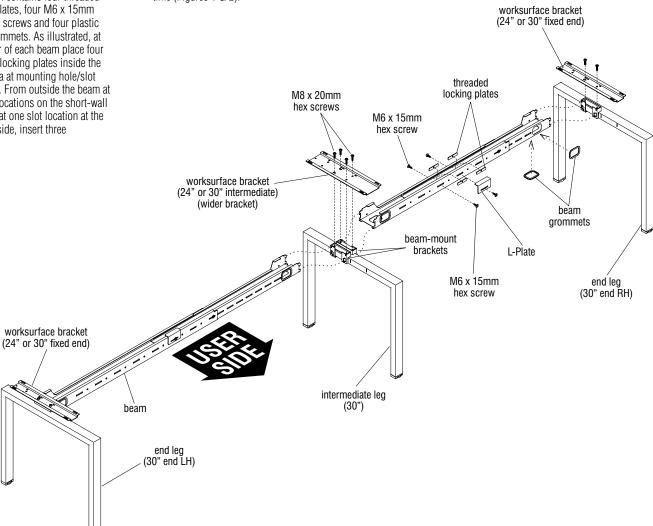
Single-Sided Fixed Benching, Multiple Worksurface "Adder" Legs & Beams
